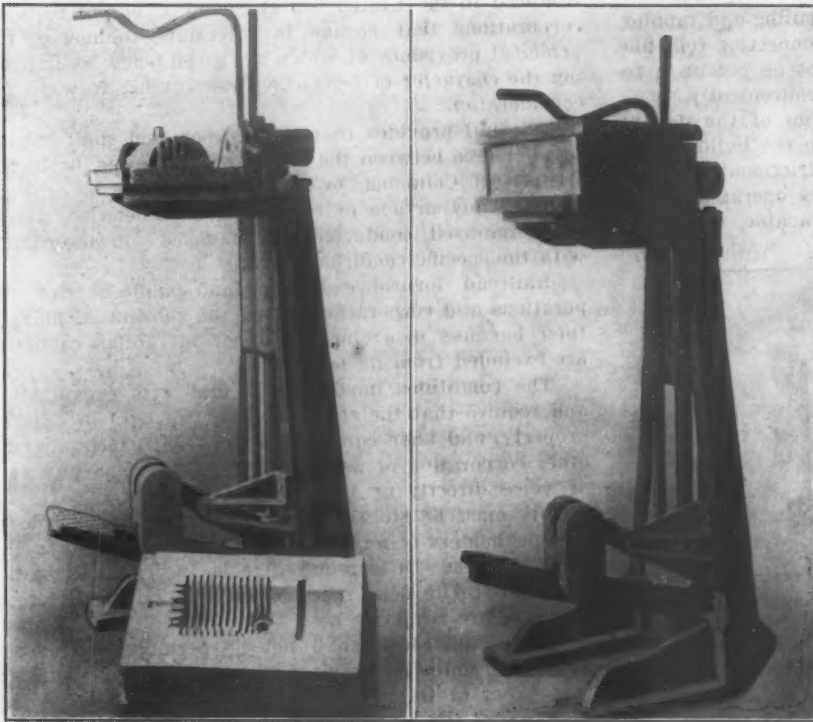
Core Machine with Pattern. Fig. 2.—Core Box Clamped Following Ramming.
